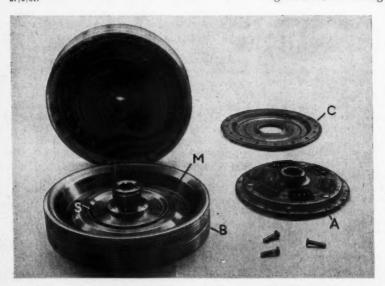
An inner rotor assembly for the automatic transmission is seen at the rear on the left, with an inner rotor, cover plate, spring drive unit and rivets
